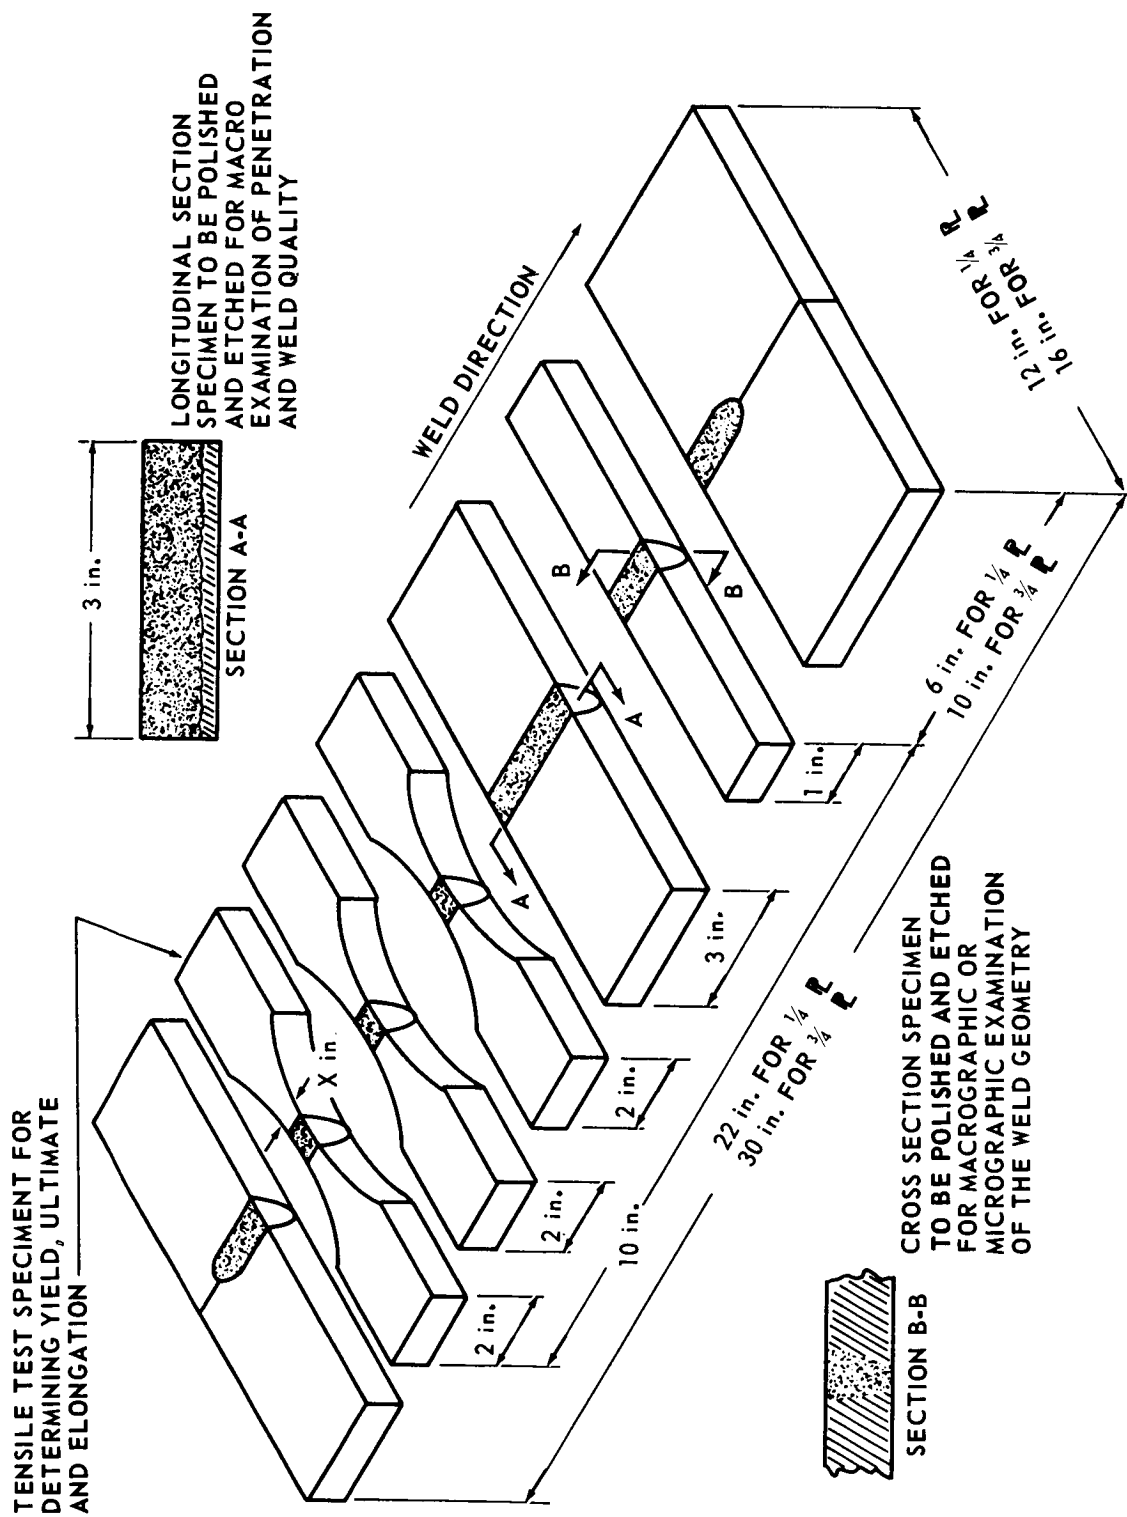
WELD TEST SPECIMEN OF 1/4- AND 3/4-IN. THICK 2219-T87 ALUMINUM ALLOY
